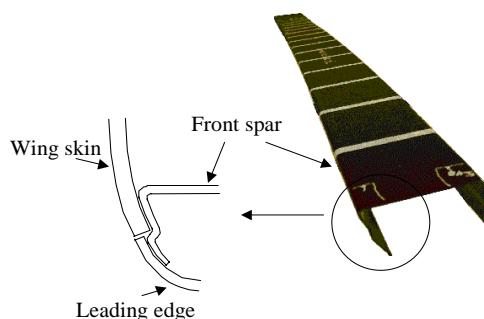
Example of a typical industrial case study regarding dimensional control in assembly.
